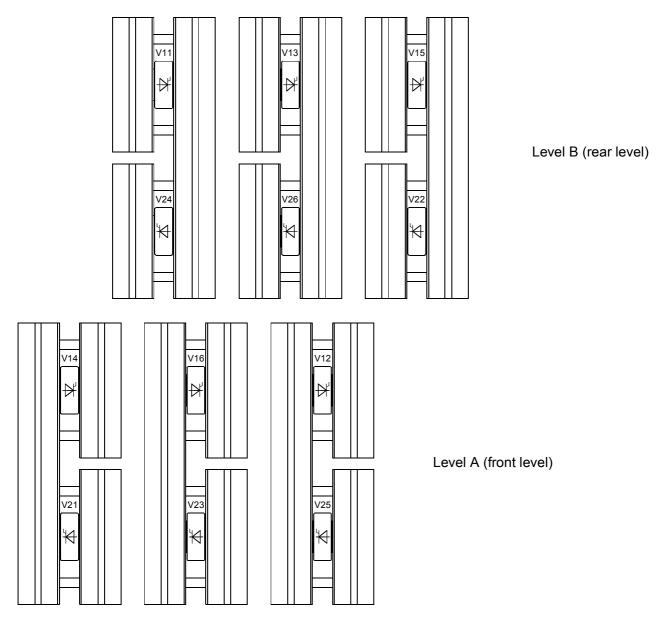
Arrangement of the thyristor blocks, Size H (see dimension drawing in Section 2.4)
